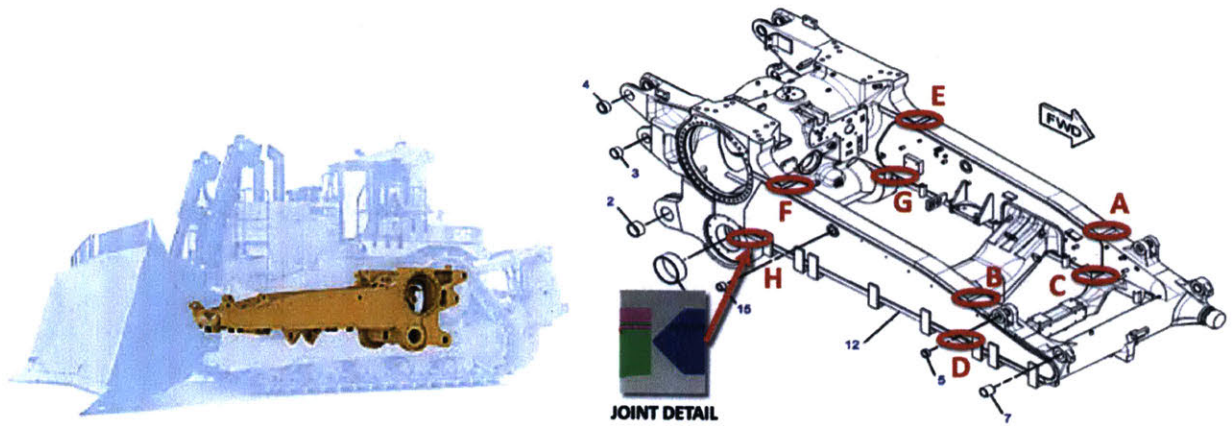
D11 CASE TO FRAME WELDMENT AND MODEL WITH BUTT WELD DETAIL
